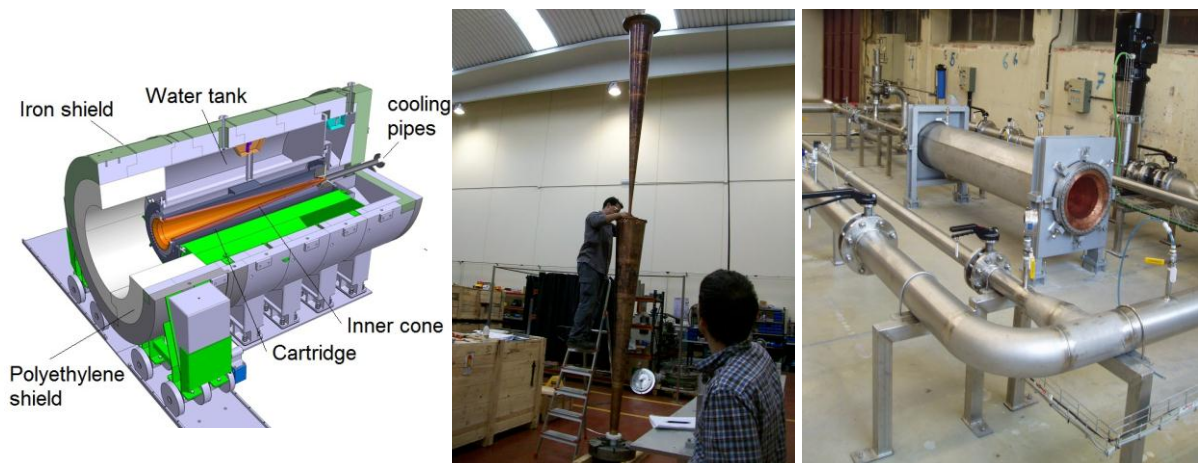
3D view of the Beam Dump; inner cone installation and cooling tests
